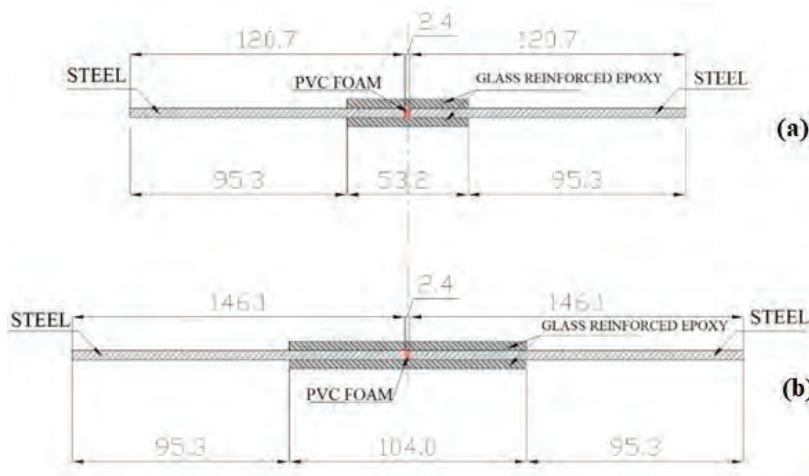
Geometry (in mm) of the specimens for the hybrid double lap joints: (a) short overlap, (b) long overlap
